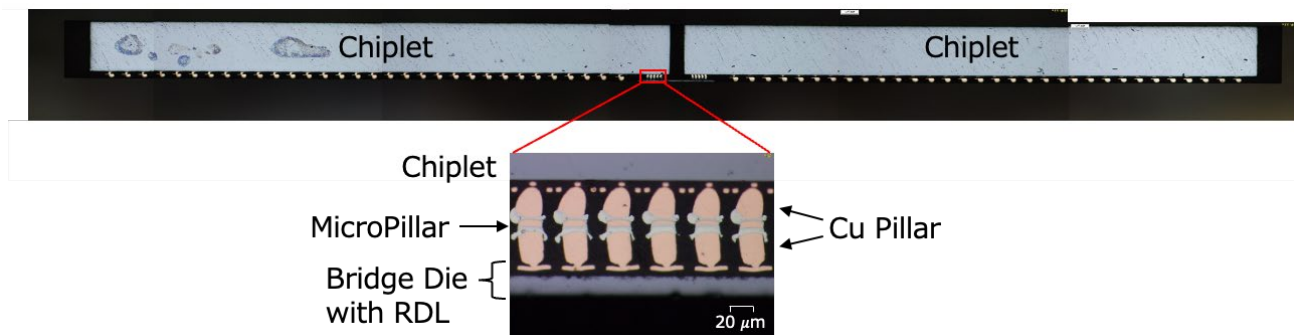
Cross-sectional view of PSB proof-of-concept sample
